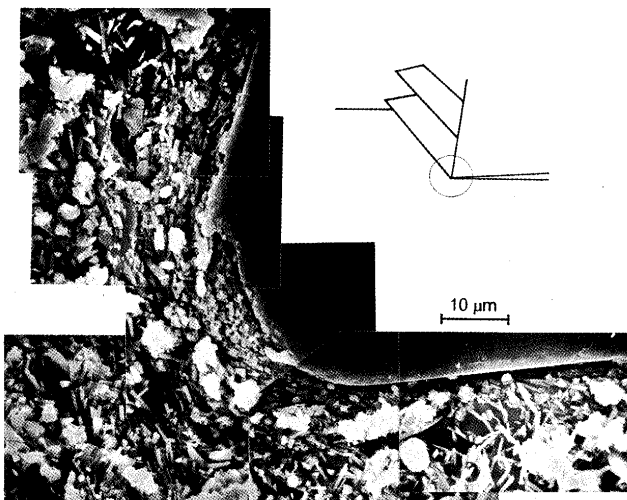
Behavior of SiC whiskers in front of the cutting edge<sup>6)</sup>. They are broken into pieces and extruded towards the machined surface and chip underlayer.
